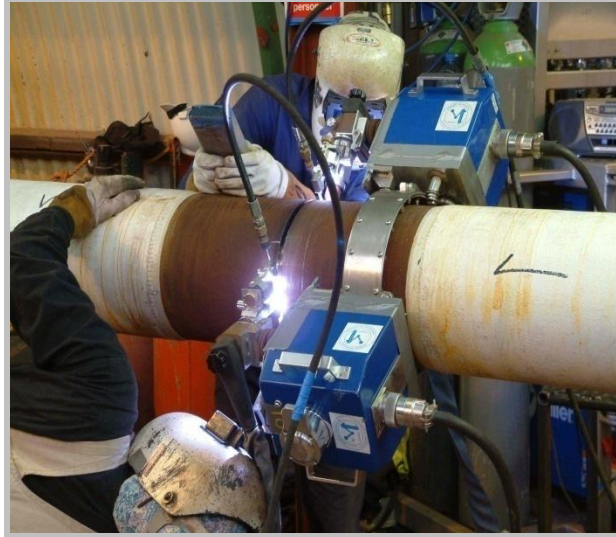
Automatic welding process with two welding ‘bugs’
